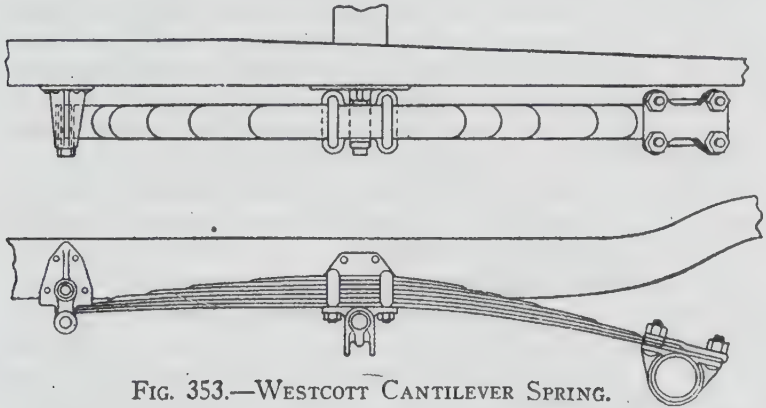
WESTCOTT CANTILEVER SPRING.
